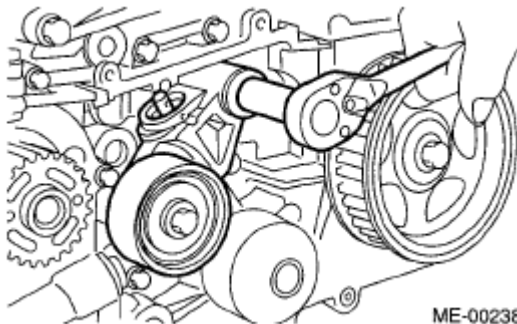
Locating Automatic Belt Tension Adjuster Assembly
